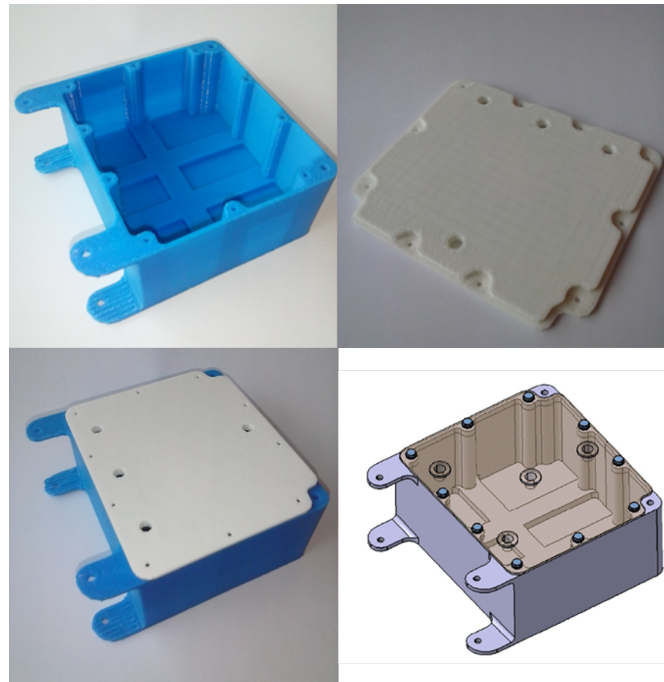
3D Printed model of the Detail Design and CAD model
